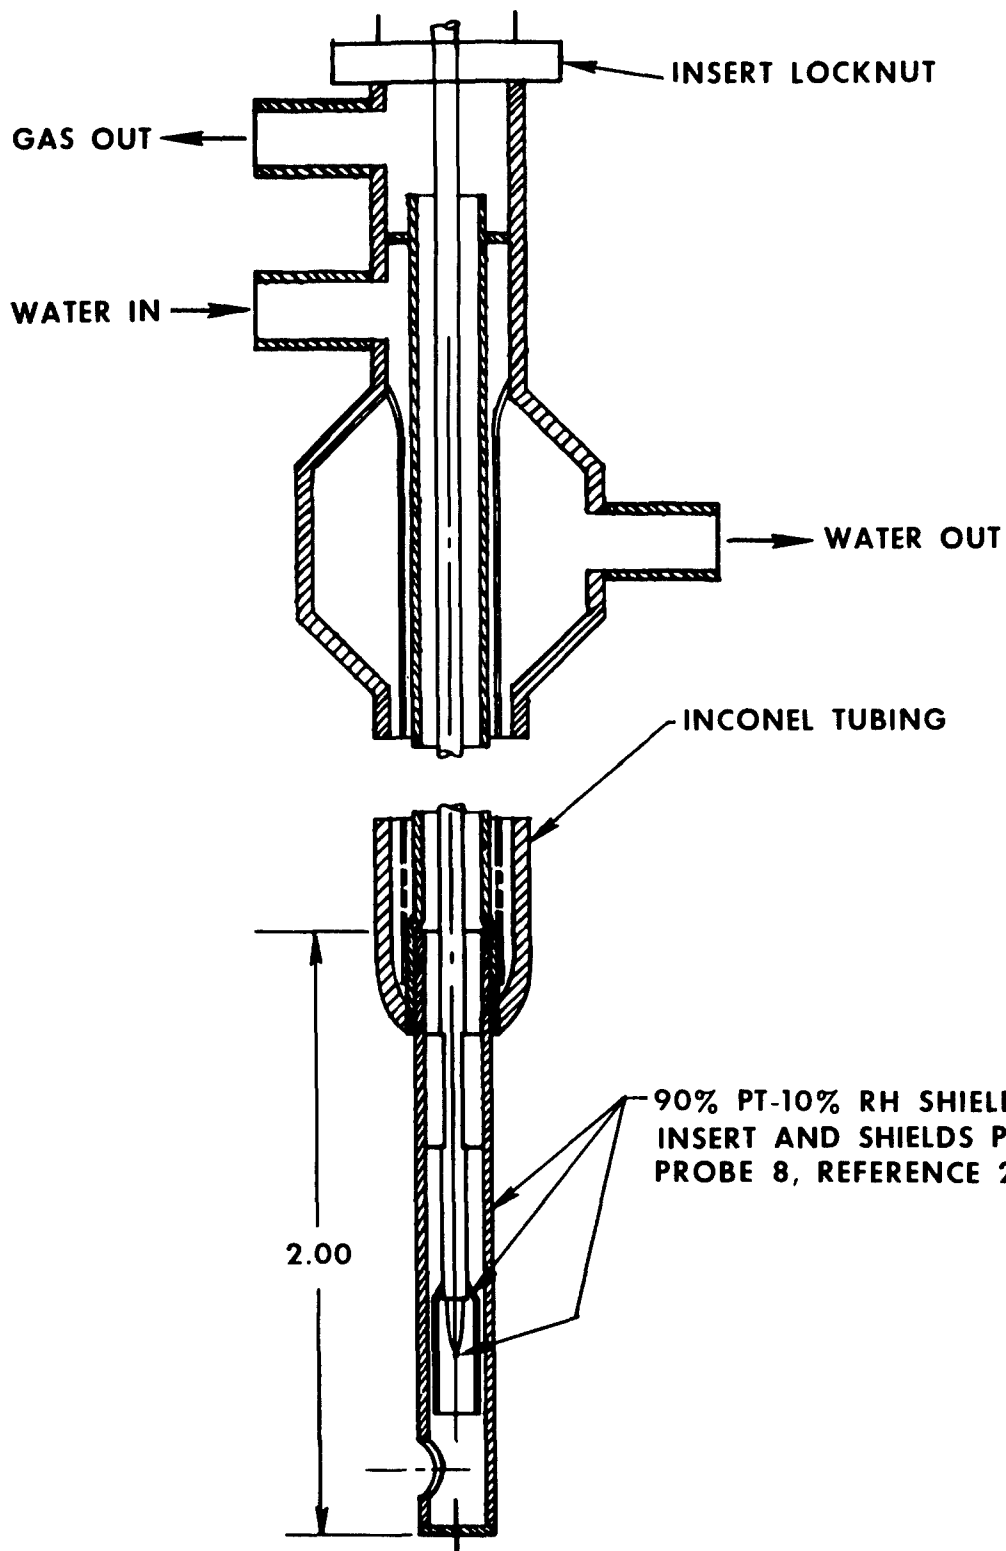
Double-Shielded Traversing Turbine Inlet Thermocouple.
